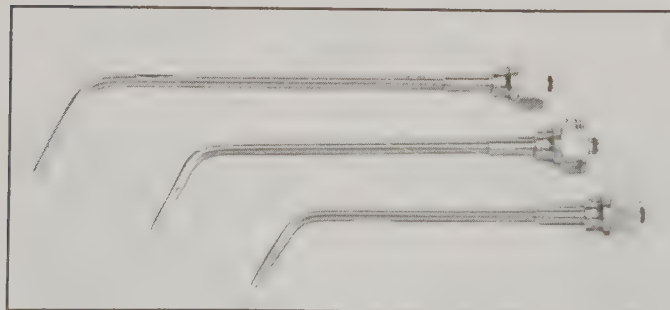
Welding tips come in different sizes. The tip is screwed hand-tight onto the torch handle. (Uniweld)
